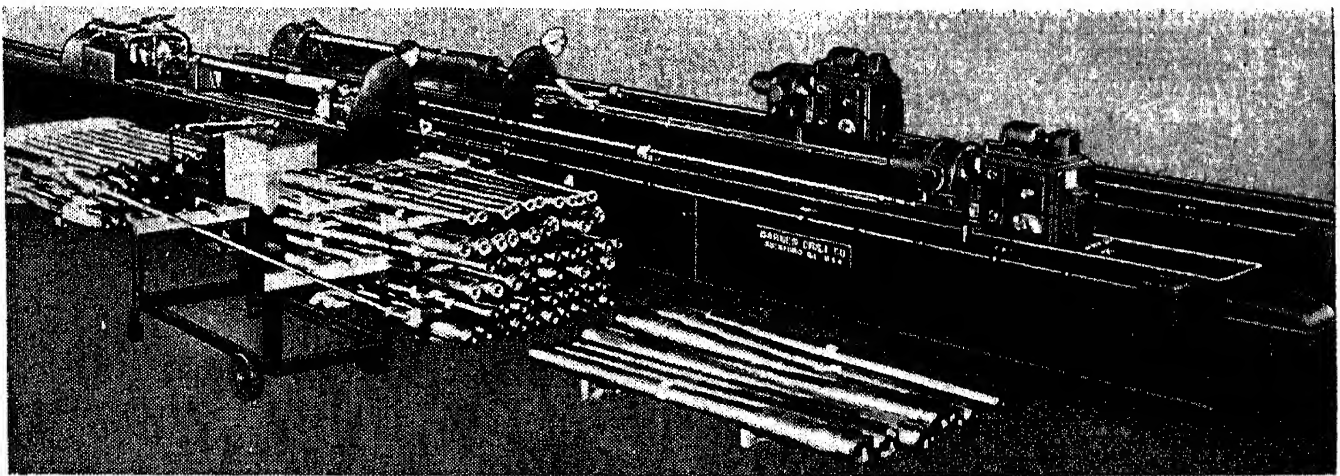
A view of two No. 2 by 18 ft horizontal honing machines honing gun bores. (Courtesy Barnes Drill Co.)
